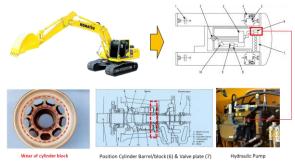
PC200-8 wear of cylinder block component [1-3]
